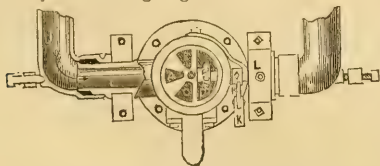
Plan showing the Face of Steam-Chest, Steam-Ports, Steam and Exhaust Pipes.
